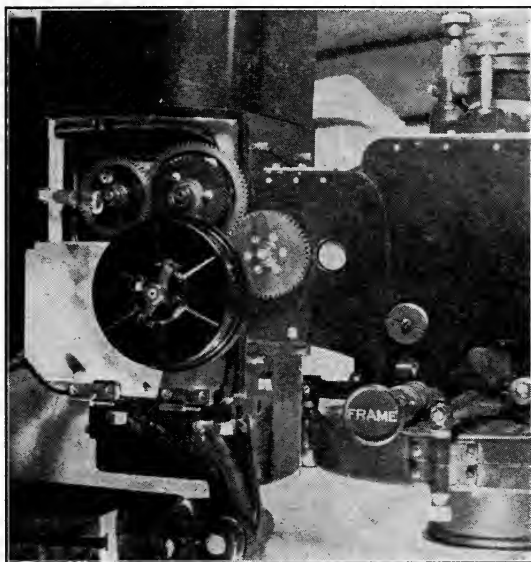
Completed mounting of projector head oil collection and projector adaptor plate and sound head. Allen screws which hold the sound head to the projector adaptor plate can also be seen.
